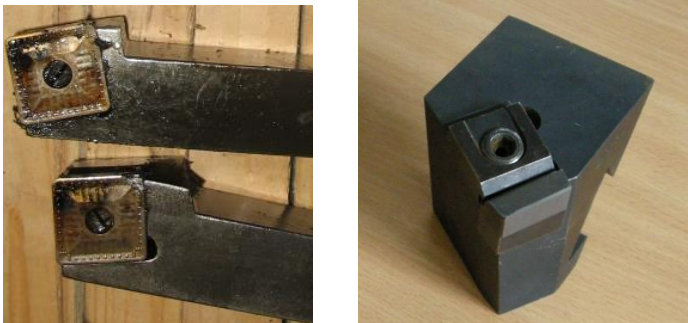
Designs of turning cutters for turning parts on heavy machine tools
